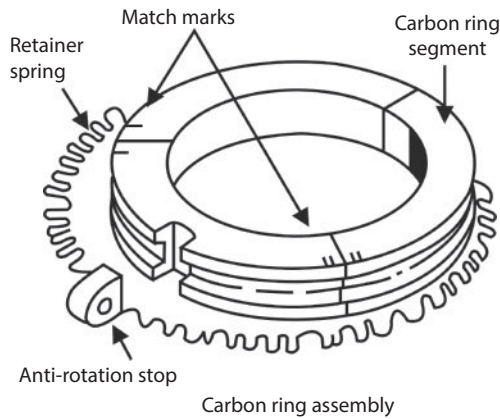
Three segmented carbon rings with garter or retainer spring and anti-rotation pin.
